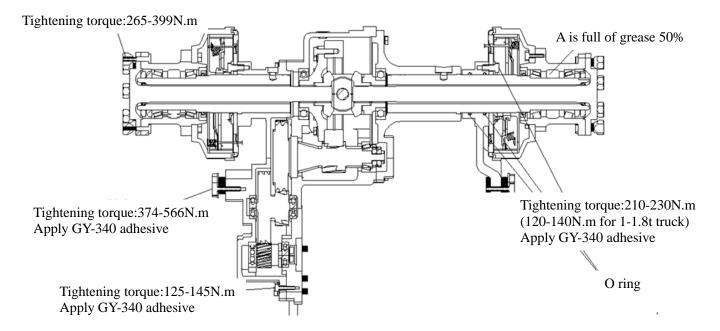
Gearbox & axle assembly(1-2.5t)
